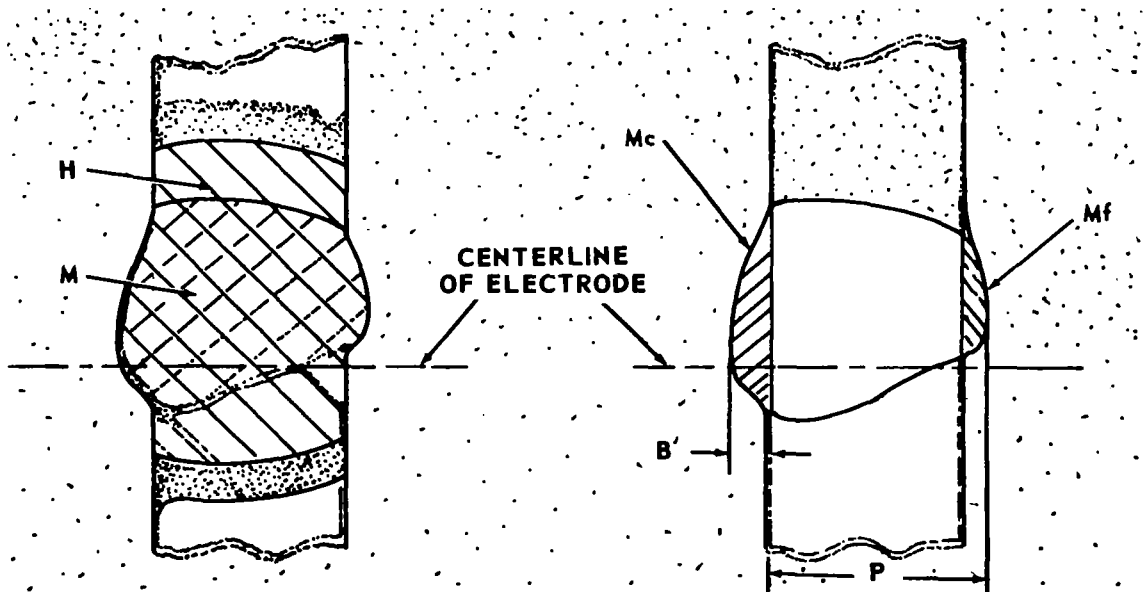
Illustrated definitions of variables related to weld cross section and penetration.
